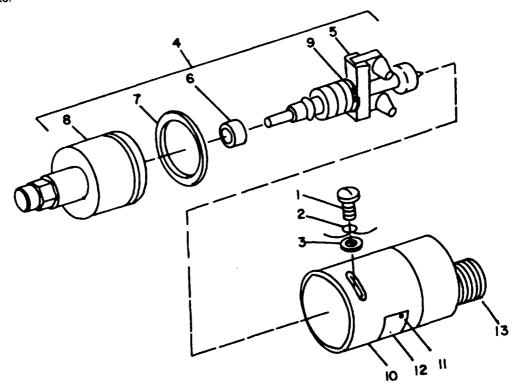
Speed Switch, Exploded View (Mechanical Switch) (Sheet 2 of 2)
